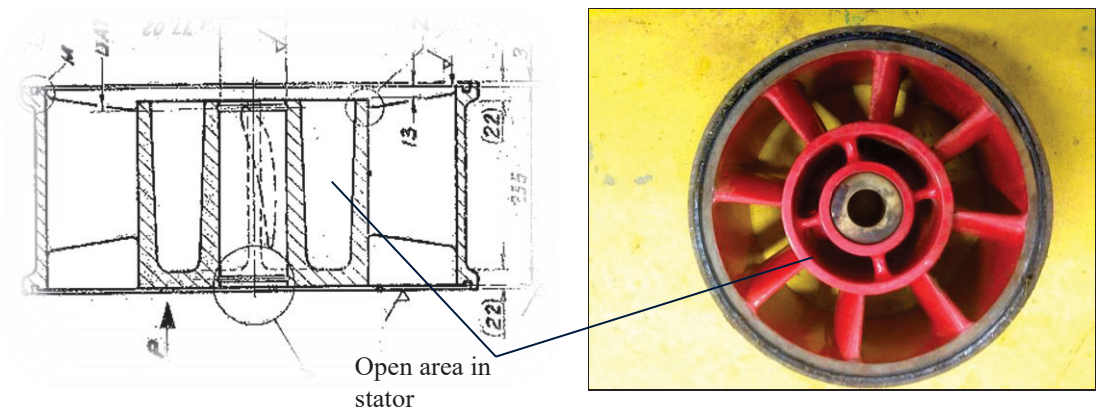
Original pump stator design (from Weir Engineering drawing)
